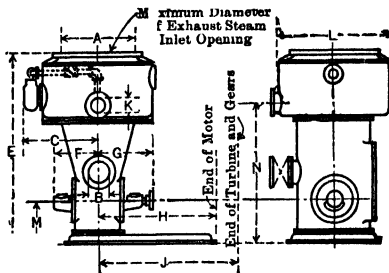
Dimensions of Wheeler low-level jet condensers.
